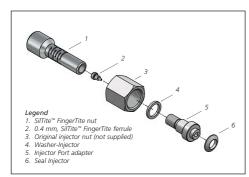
Exploded diagram of the Injector Adapter SilTite™ FingerTite assembly
